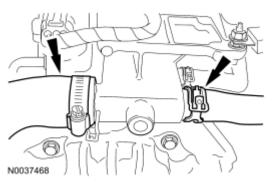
Locating Upper Radiator And Heater Hoses Courtesy of FORD MOTOR CO.
